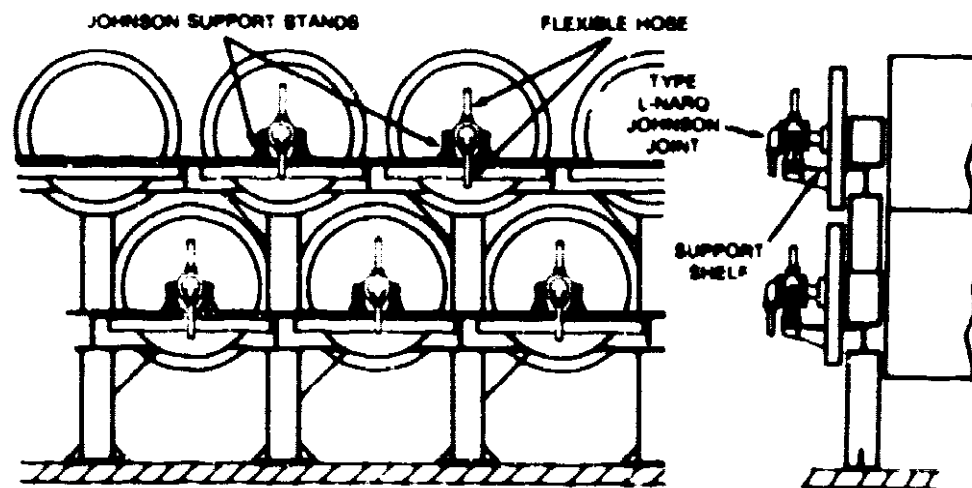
Suggested method of supporting Type N Joints using Johnson Support Stands, Support Rods and Flexible Hose
